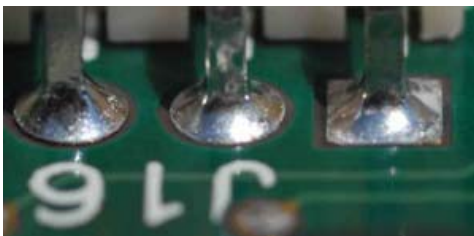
Typical parts wave soldered with SnCu based solder, board top and bottom
